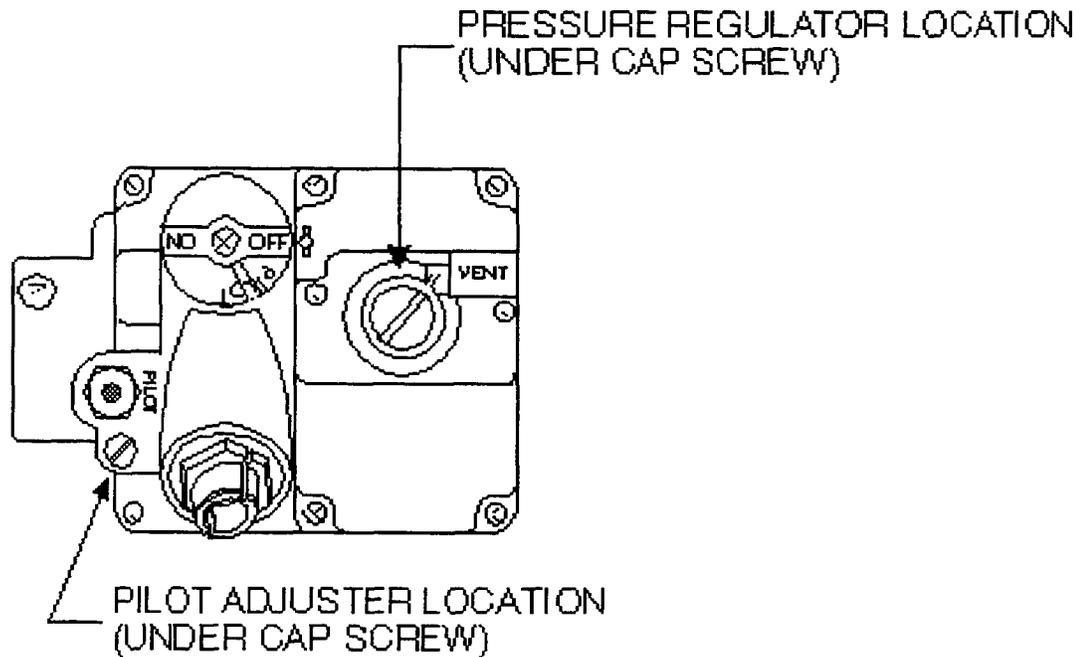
Gas Valve Showing Location of Pressure Regulator and Pilot Adjusters
